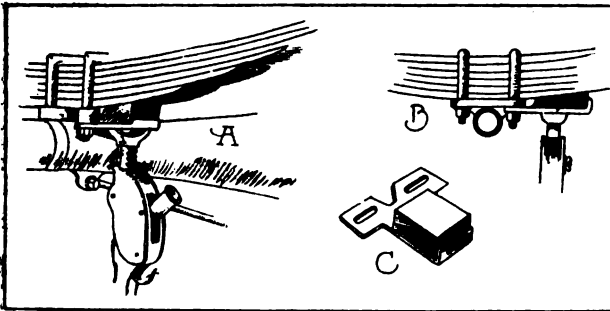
Jack Block for Attachment to Rear Springs, to Prevent Head of Jack from Slipping When Raising Wheel, Etc.
